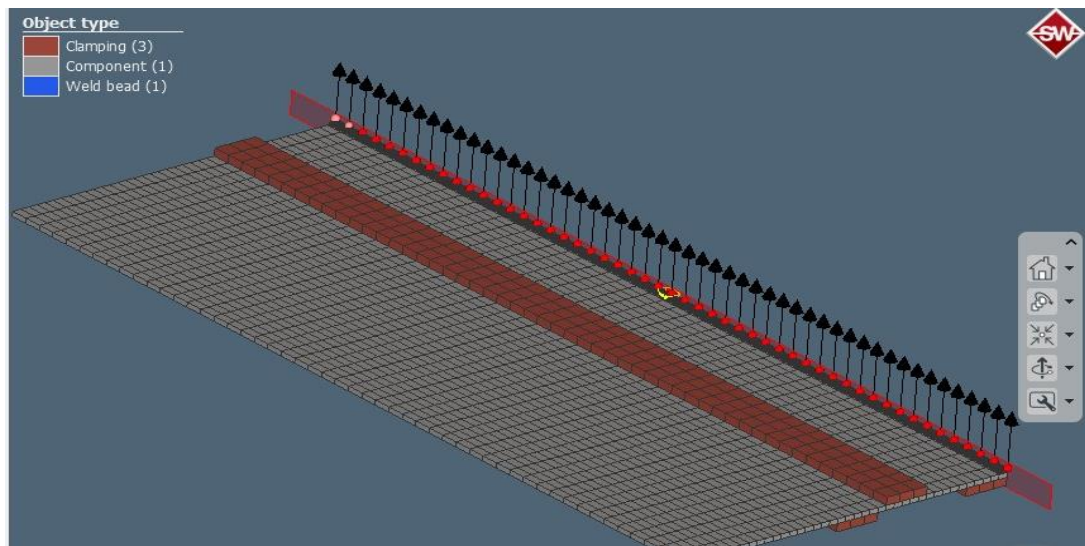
Assembled model of welding setup with a symmetry plane.
